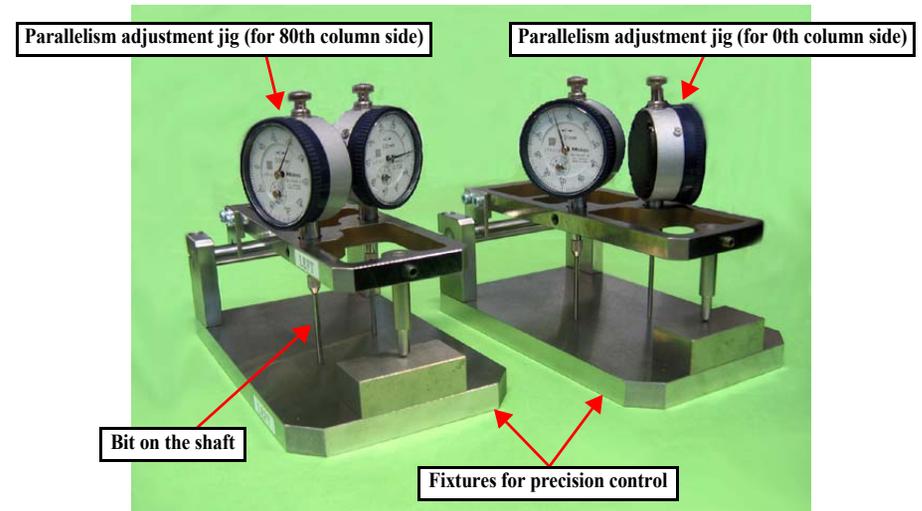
Parallelism adjustment jig/Fixtures for precision control
